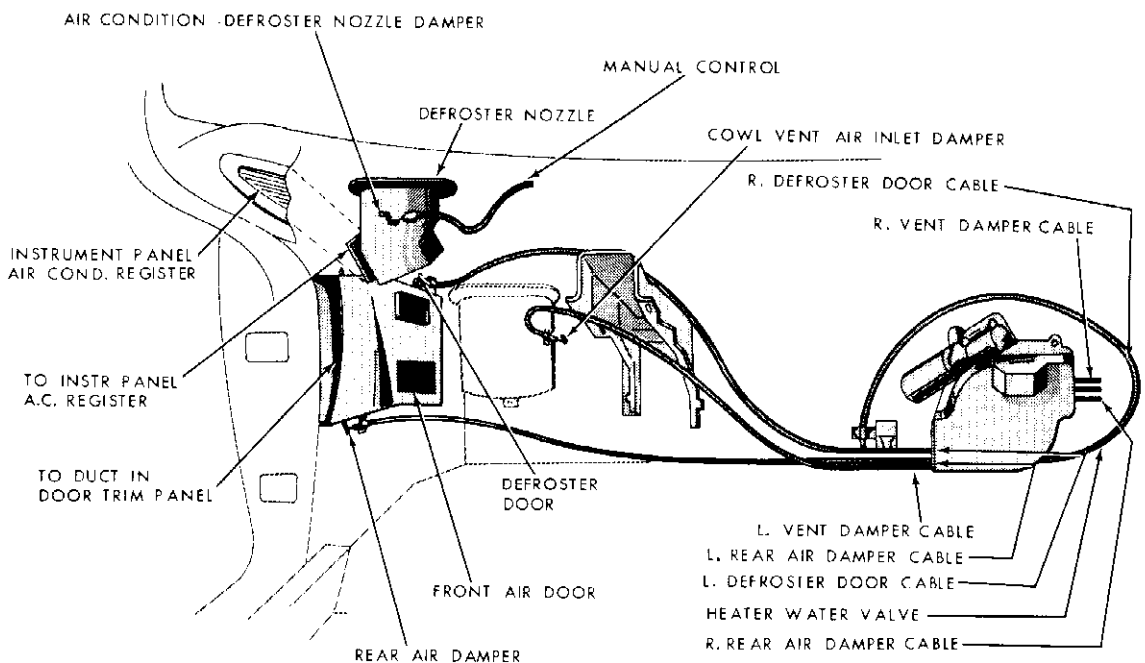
Air Duct and Damper Identification—(9L-8804)
